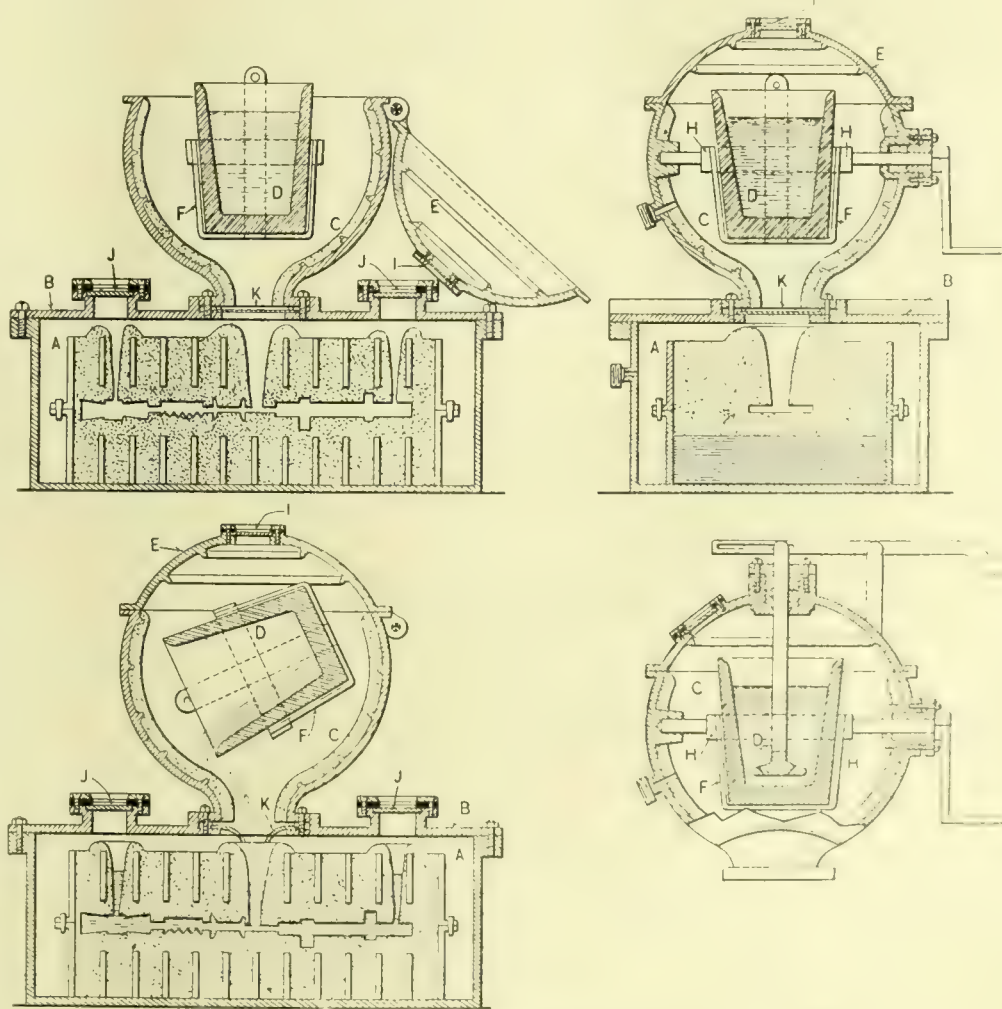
EQUIPMENT FOR POURING SAND Moulds IN A VACUUM
